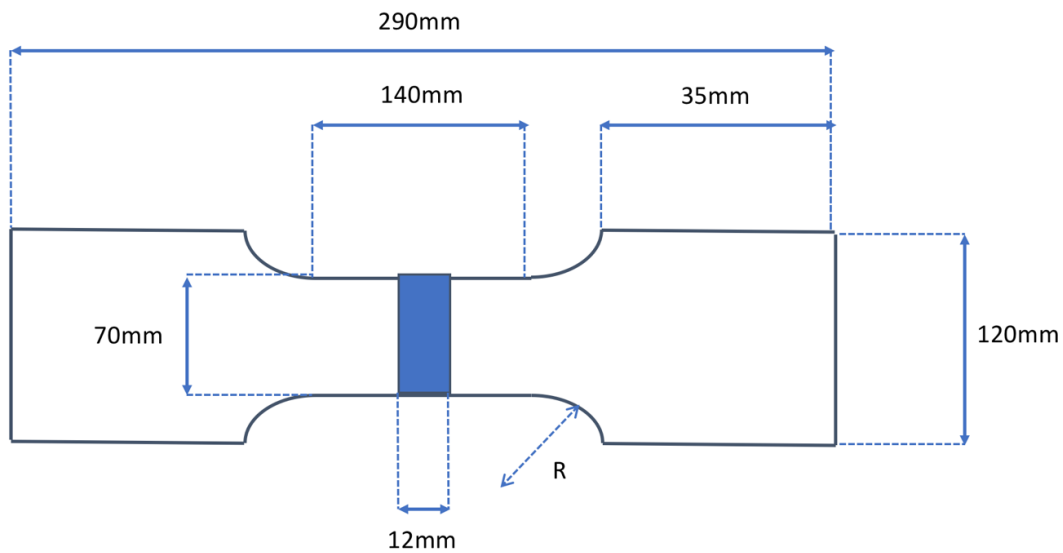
Work sketch of the cross-weld tensile test specimens. The weld was centred in the middle of the specimens.
